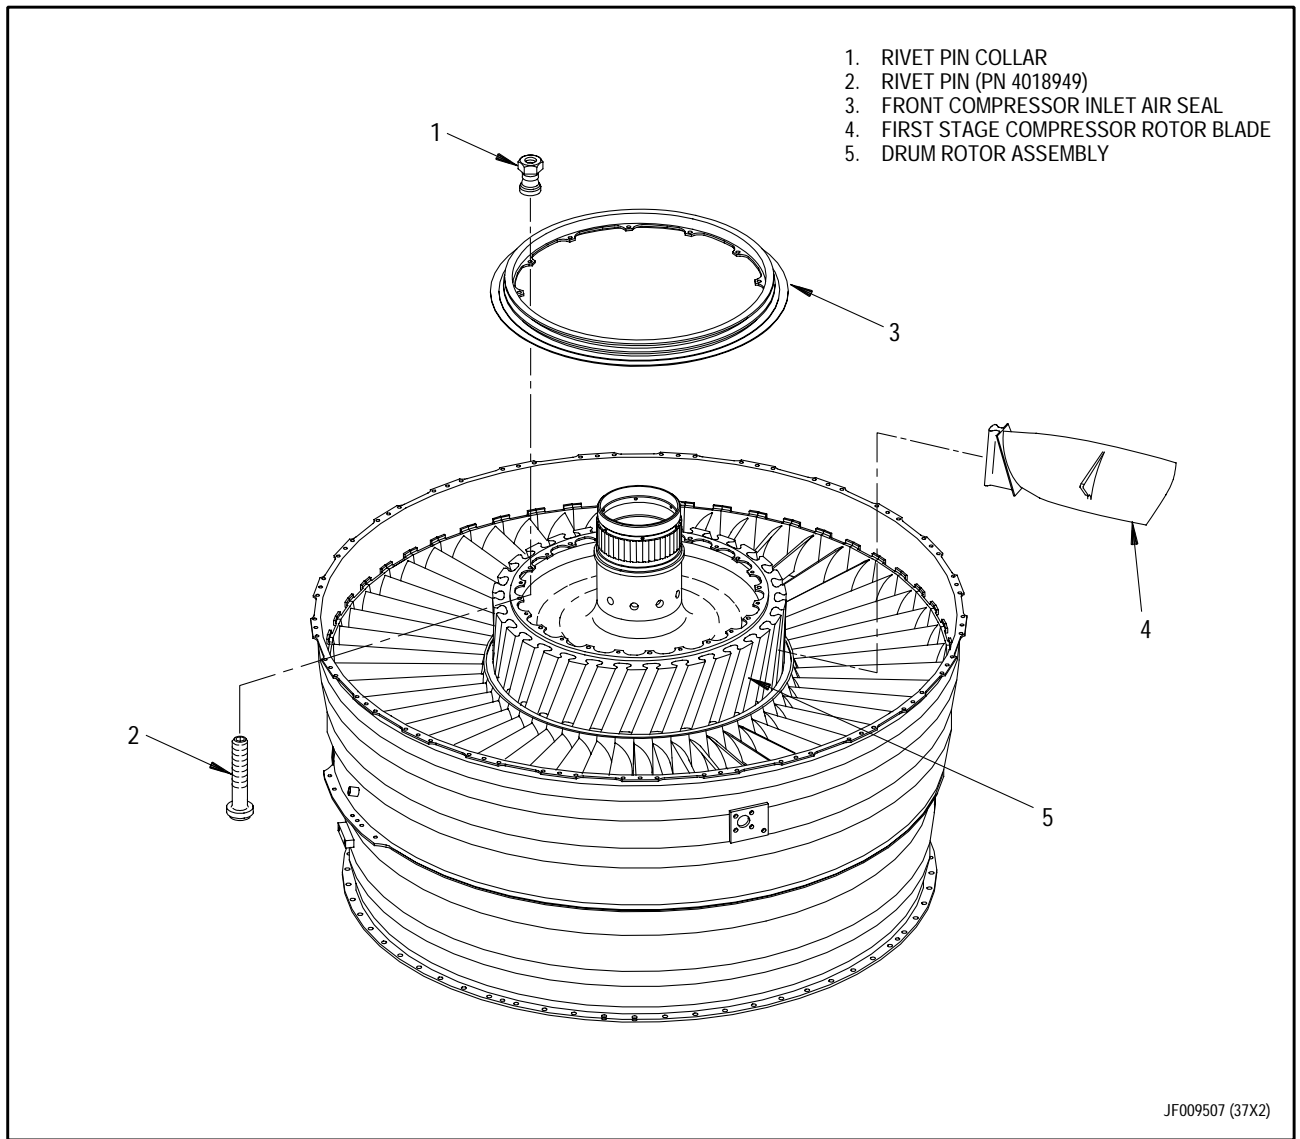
First Stage Compressor Rotor Blades and Front Compressor Inlet Air Seal - Installation
